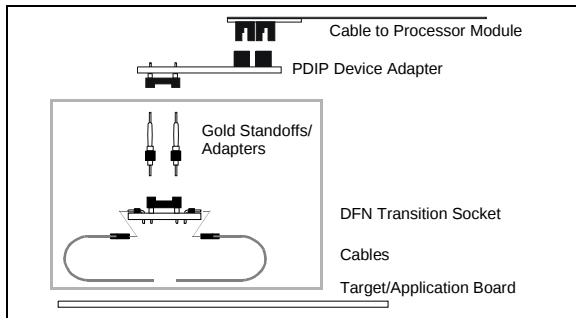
QFN TRANSITION SOCKET WITH CABLE
